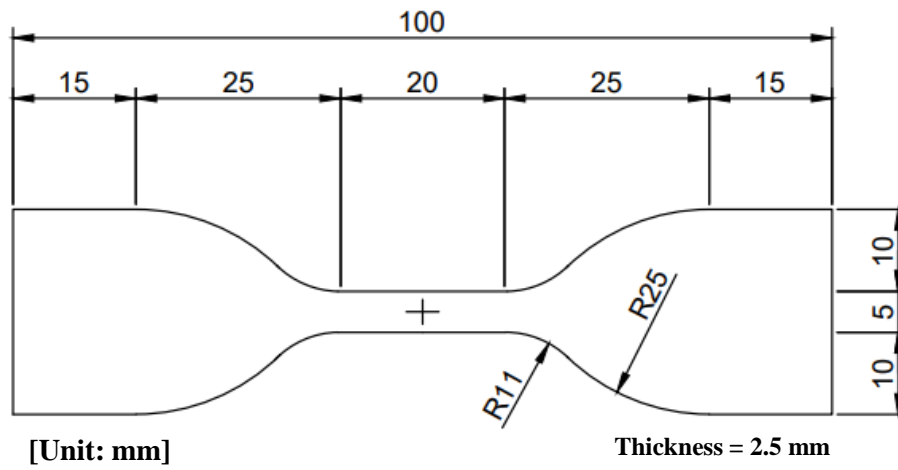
Tensile coupon test specimen of rubber material per ASTM D 412 standard.
